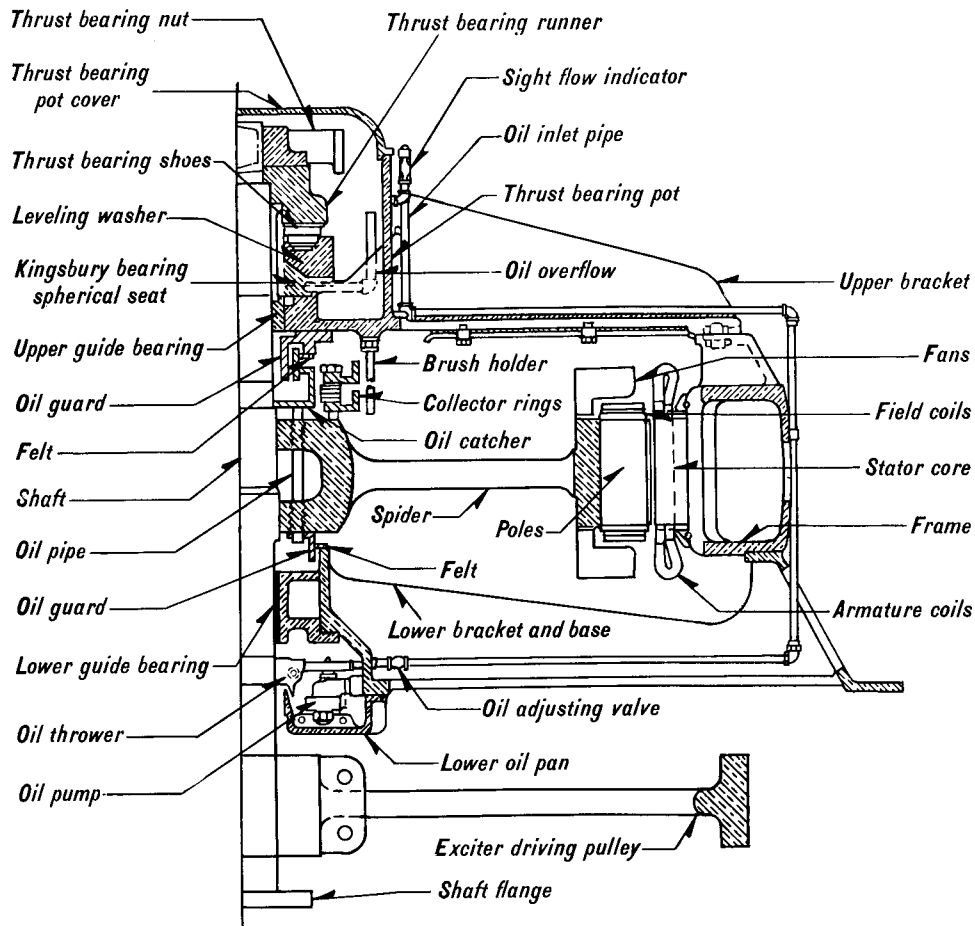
Cross-Section of Type EV Generator Showing Arrangement of Oiling System
